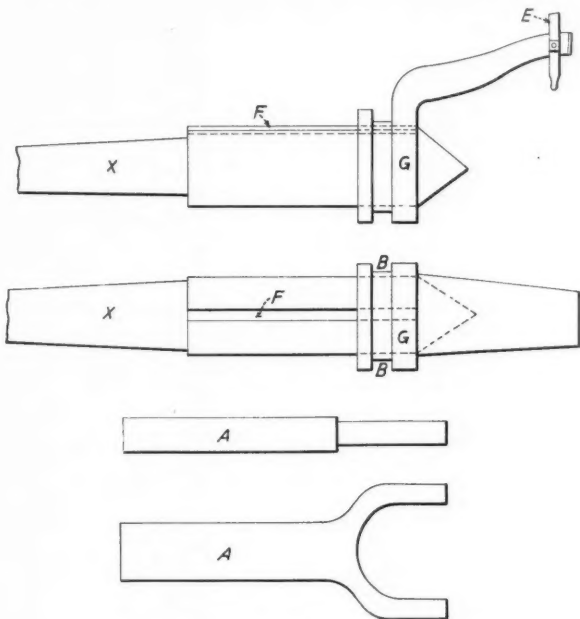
Tool for Turning the Ends of Shafts. Snyder.
